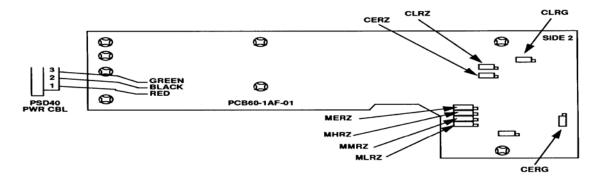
PCB60-1AF-01, side 2 - adjustment locations.
